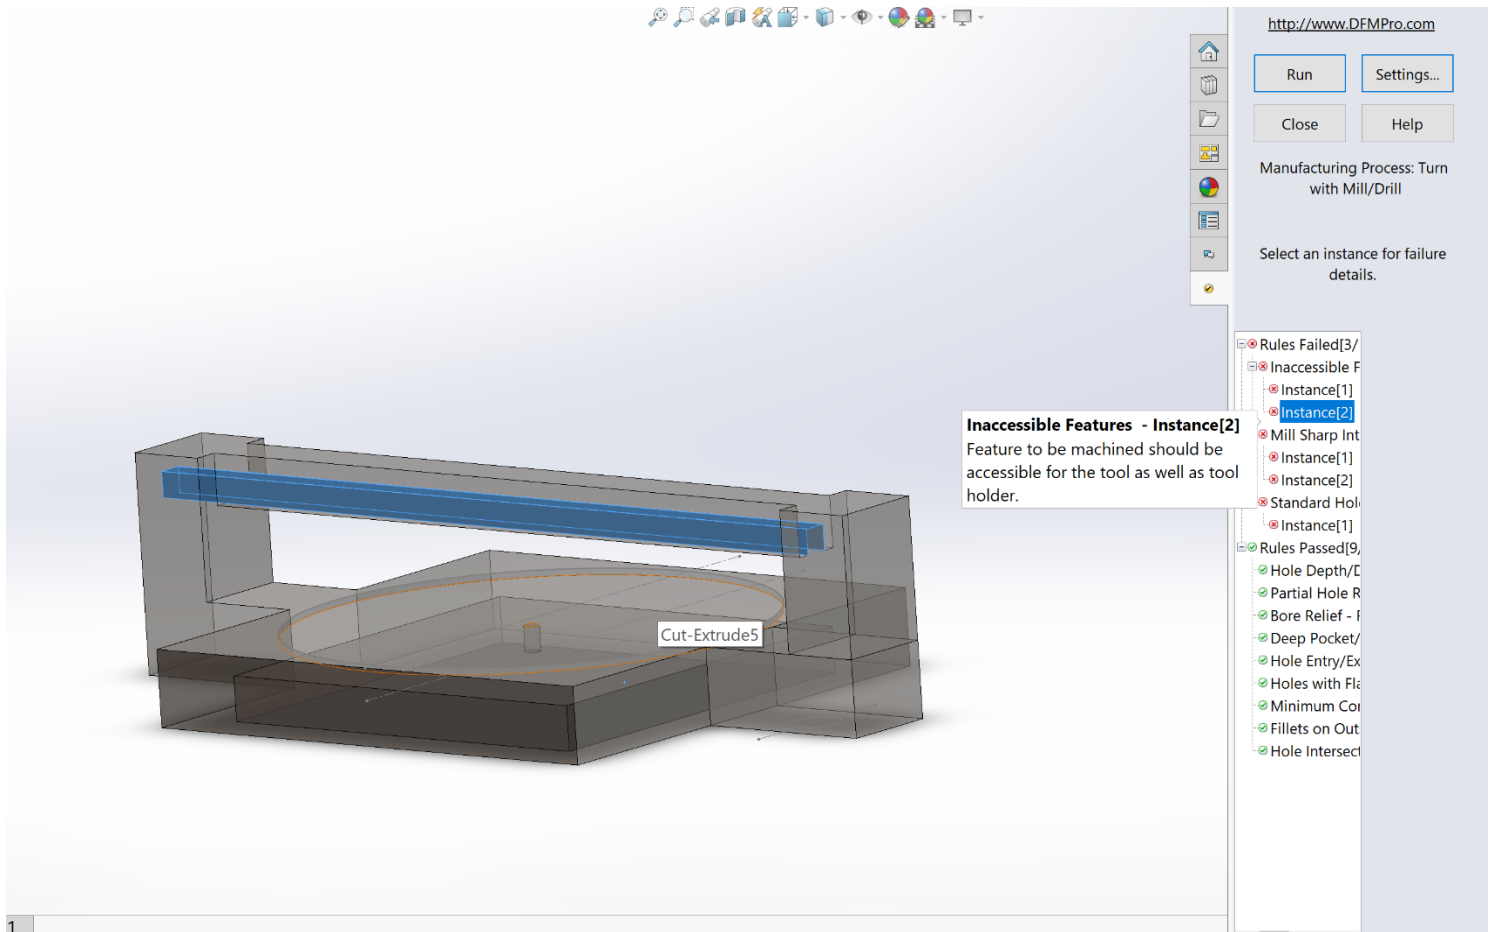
DFMXpress analysis using a Turn with Mill/Drill
